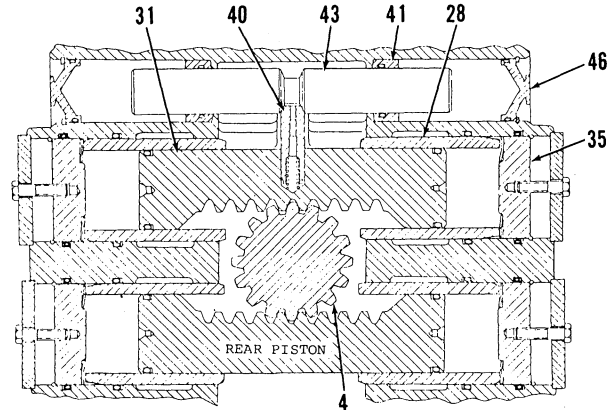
Cross-sectional view of steering motor used on 4650 and 4850 tractors showing locations of pistons in relation to spindle (4). Refer to Fig. 37 legend for identification of parts.
